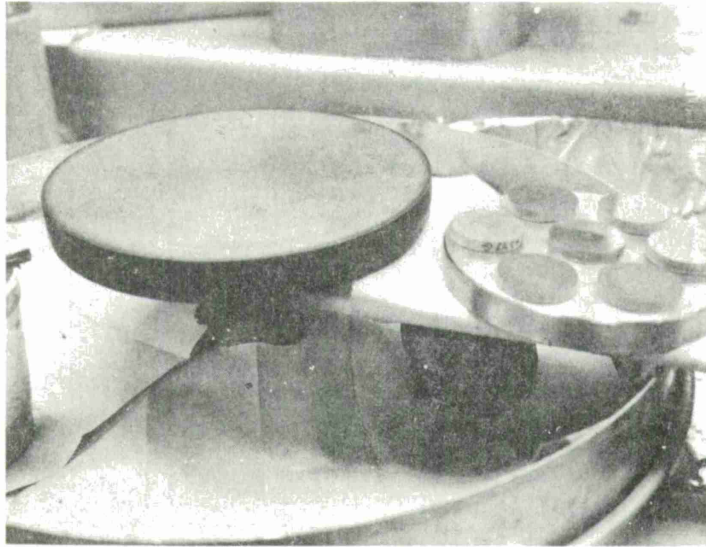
Metal Grinding Tool for Fine Grinding Plano-Plano Surfaces
